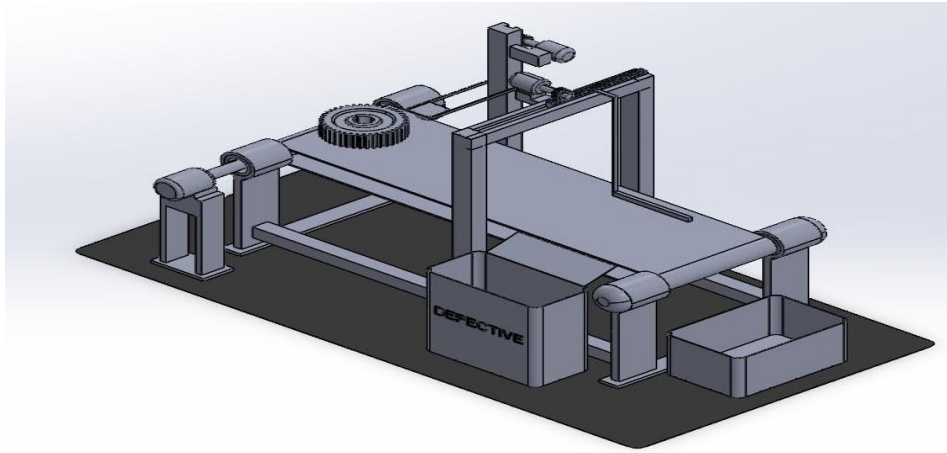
Complete assembly of the gear defect detection system with belt conveyor.
